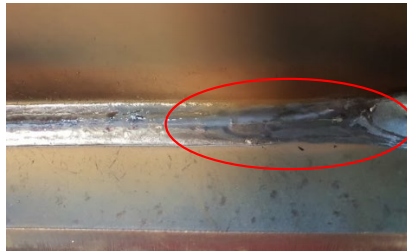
Phenomenon of SiO_2 on the welding seam.
